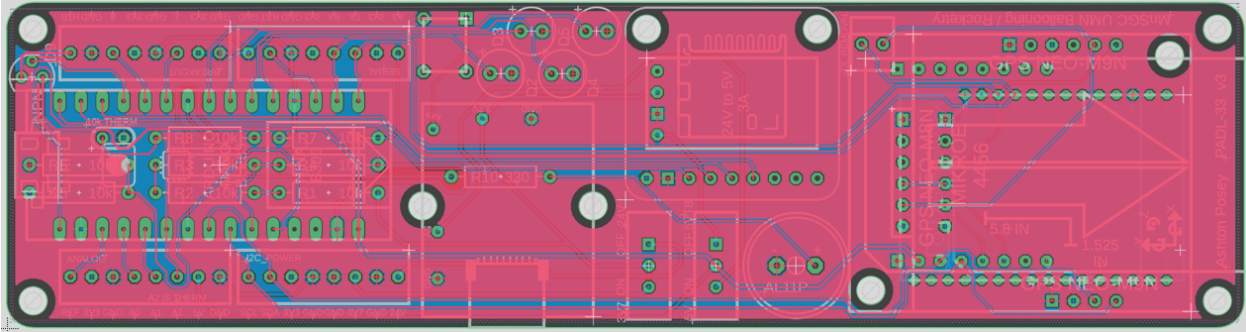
PADL-33 custom PCB Wiring Diagram, drawn with Fusion 360 Electronics Designer.
